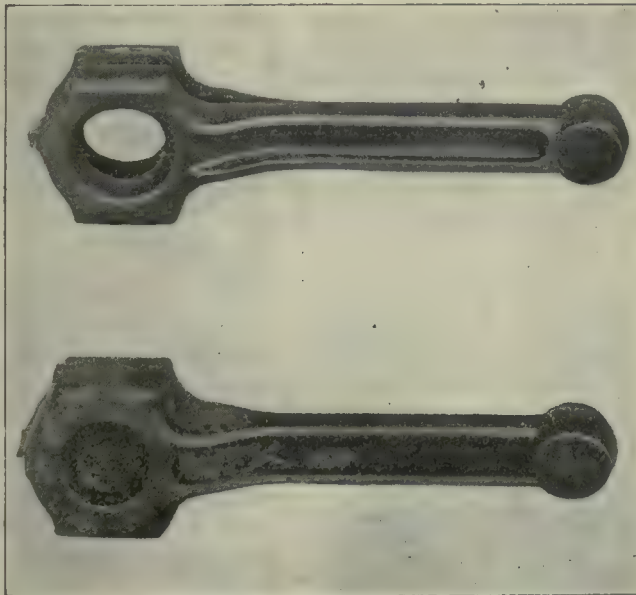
FORKED-ROD FORGINGS BY PACKARD
